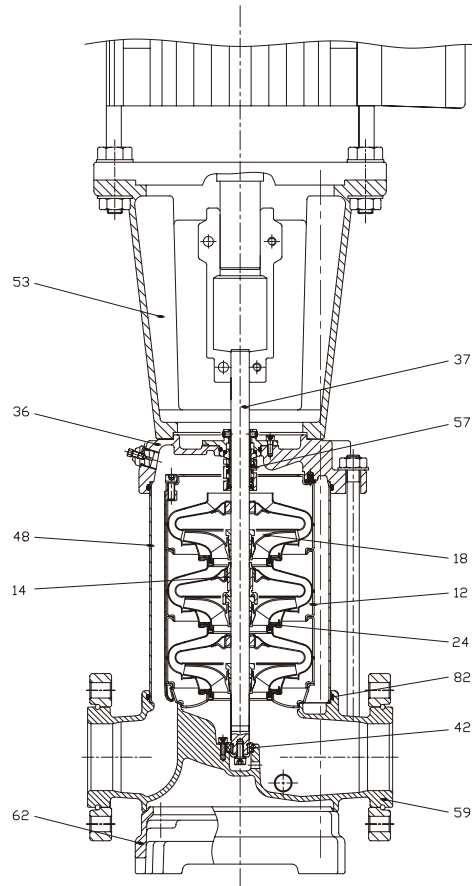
MVI - 160, 225, 320, 450 Section View
